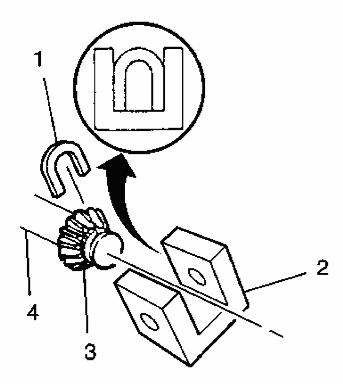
View Of Axle Shaft, Lock & Thrust Block Courtesy of GENERAL MOTORS CORP.
